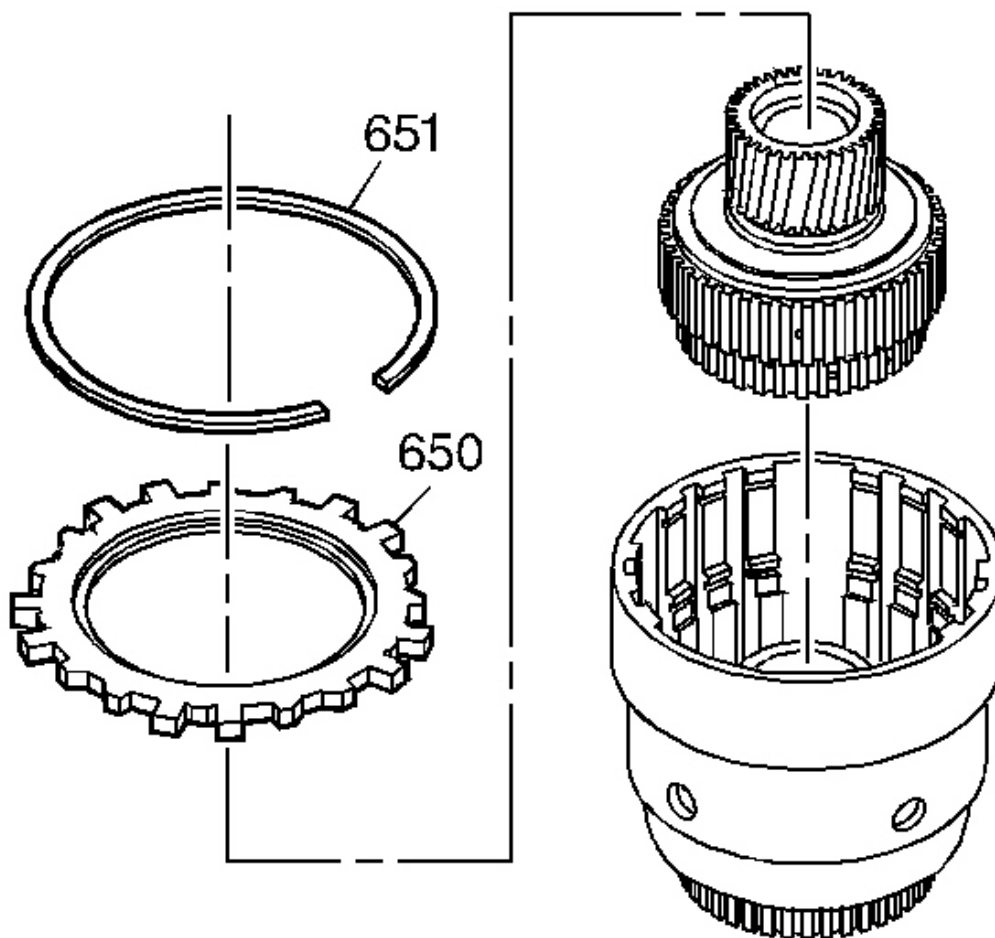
Identifying Forward Clutch Selective Backing Plate & Retainer Ring
